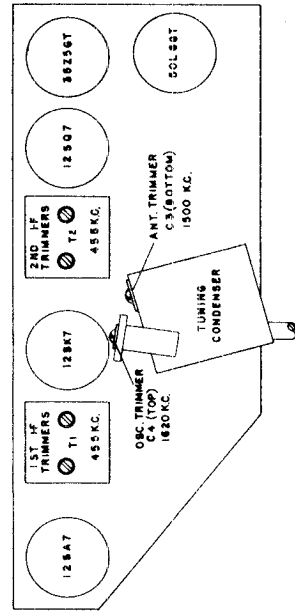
TUBE & TRIMMER LOCATION (TOP VIEW)
